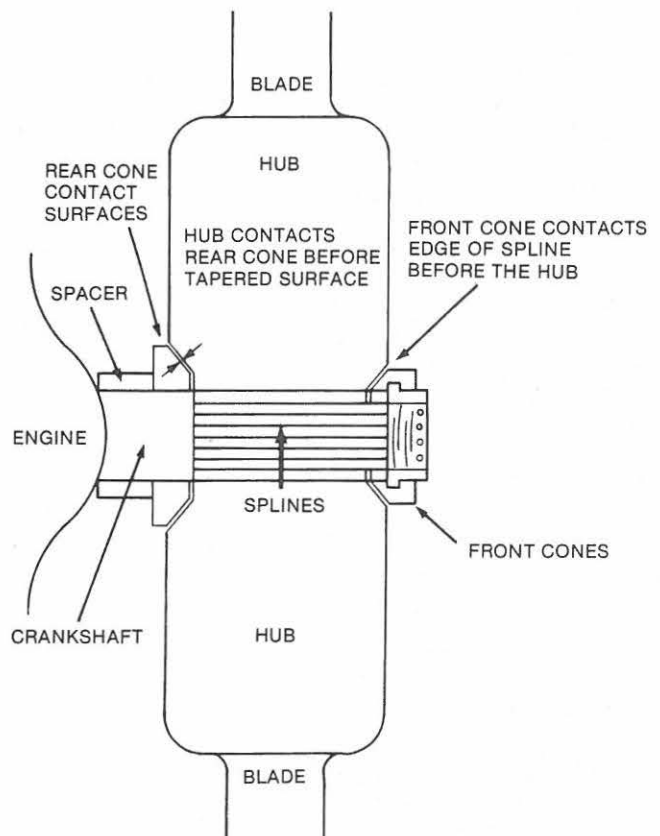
Cone bottoming on splined-shaft propeller.
